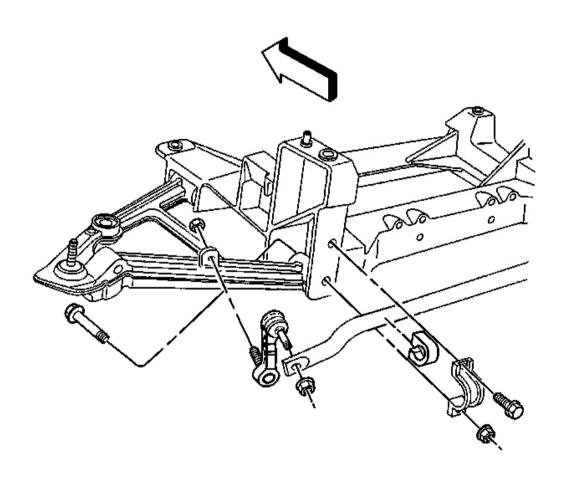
Rear Stabilizer Shaft Brackets, Bolts & Insulators Courtesy of GENERAL MOTORS CORP.
